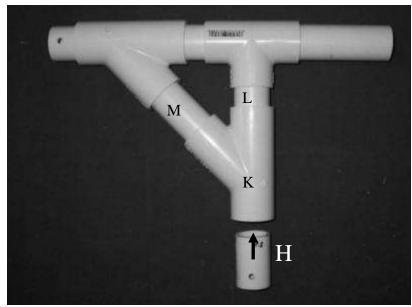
Assembly of the Medium/Large Wheelchair (Step 8).
